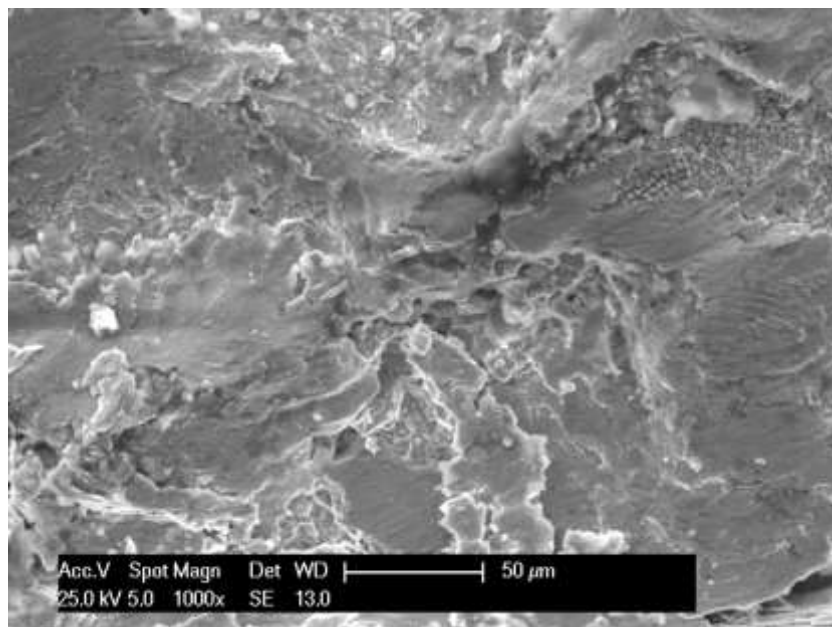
Cleavage facet indicating quasi-brittle fracture mode of the clad layer of a 420 stainless steel clad sample
